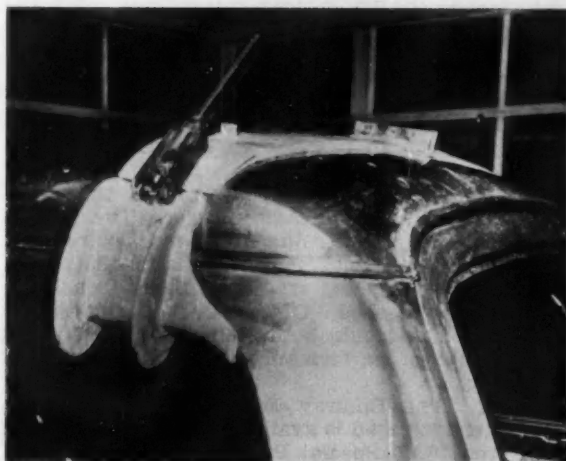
Exactness in this spot welding jig is ensured by direct lay-up. This technique eliminates hand barbering and finishing.
